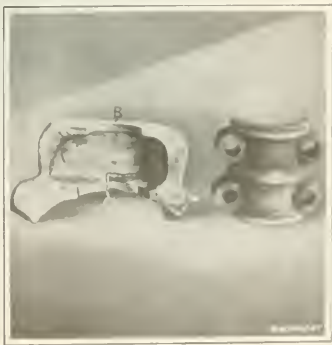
Plaster-of-paris Pattern for Missing Part and Rear-end Bearing Cap
